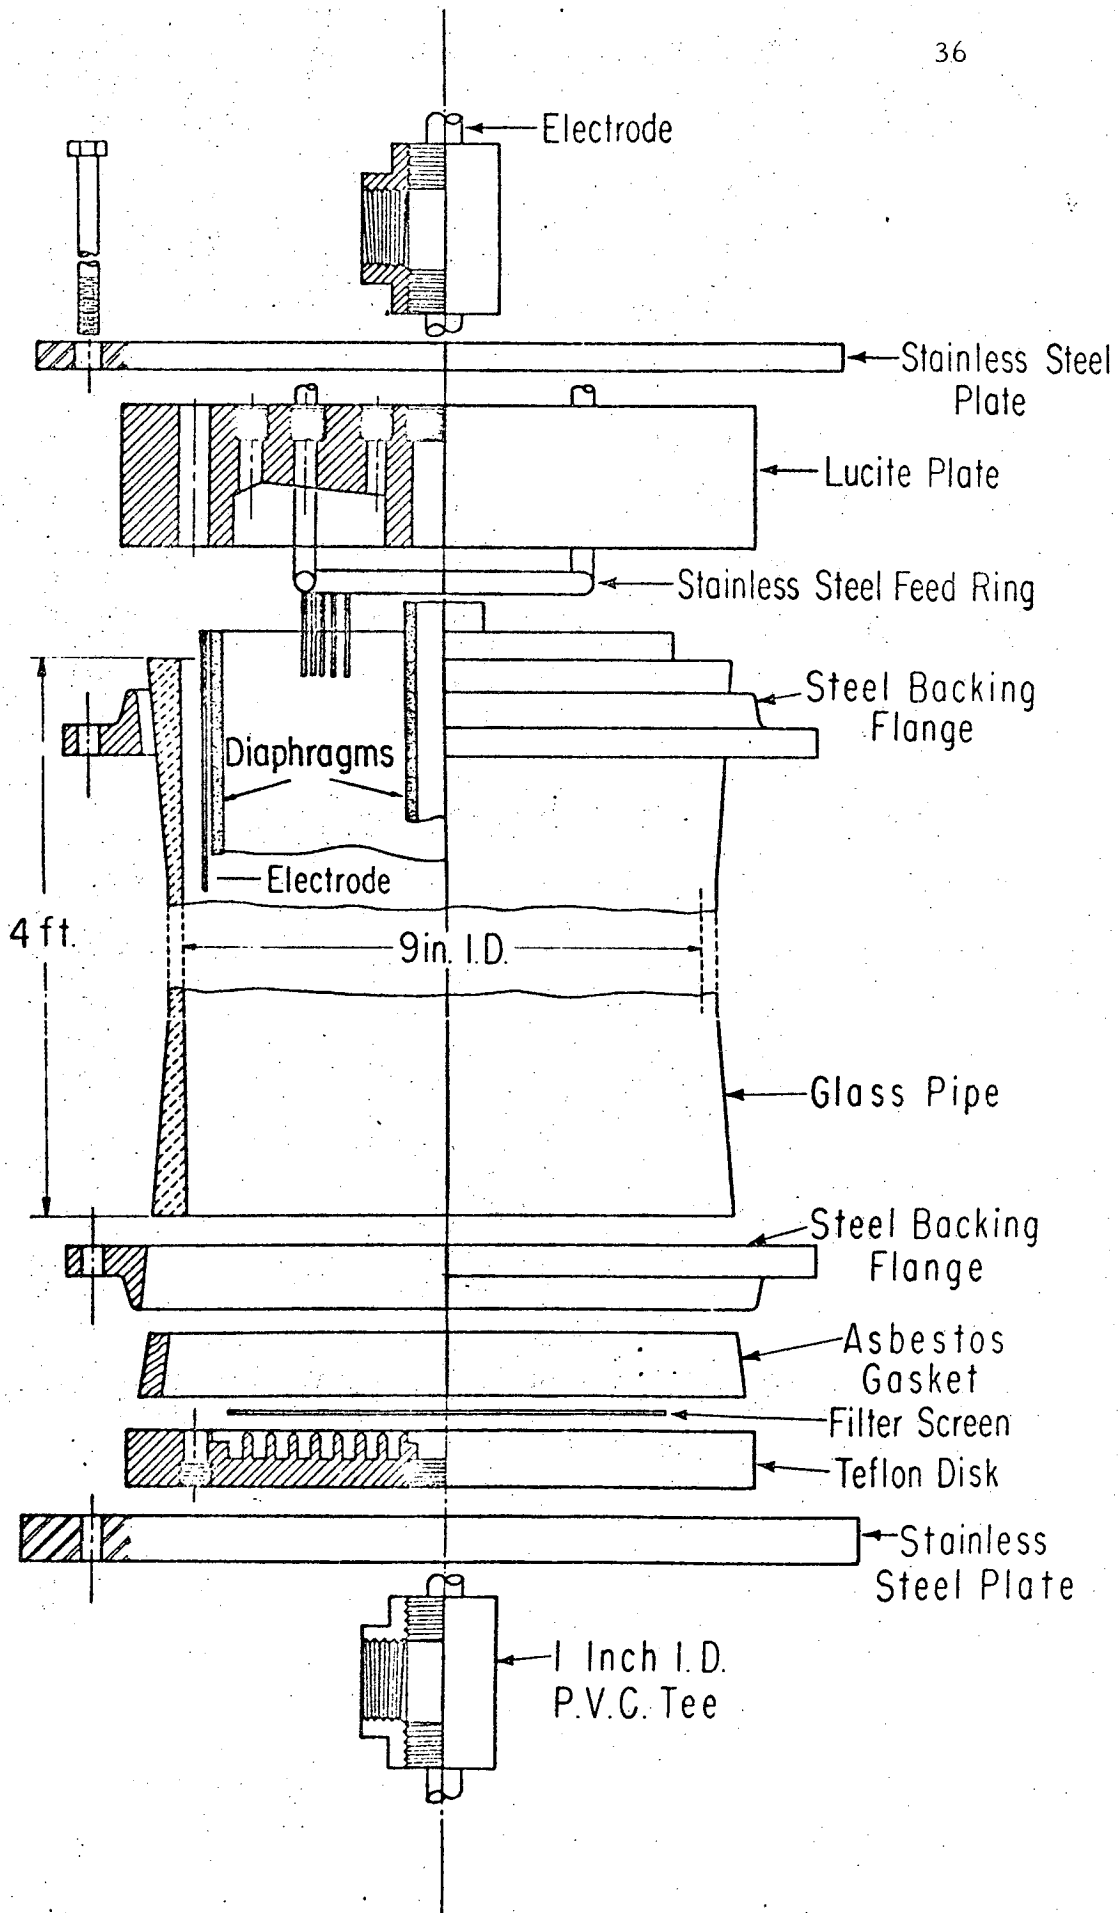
Exploded cross-sectional diagram of separation unit, showing construction and mode of assembly
